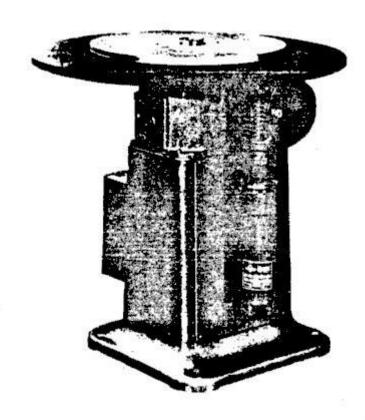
Standard rotary table component used on dial indexing machines. (Courtesy of Ferguson Machine Co.)
